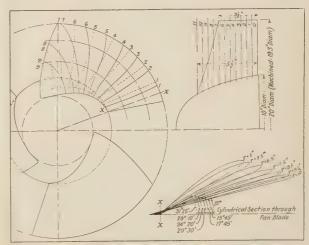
Pattern Drawing for Three-Bladed Fan Wheel
